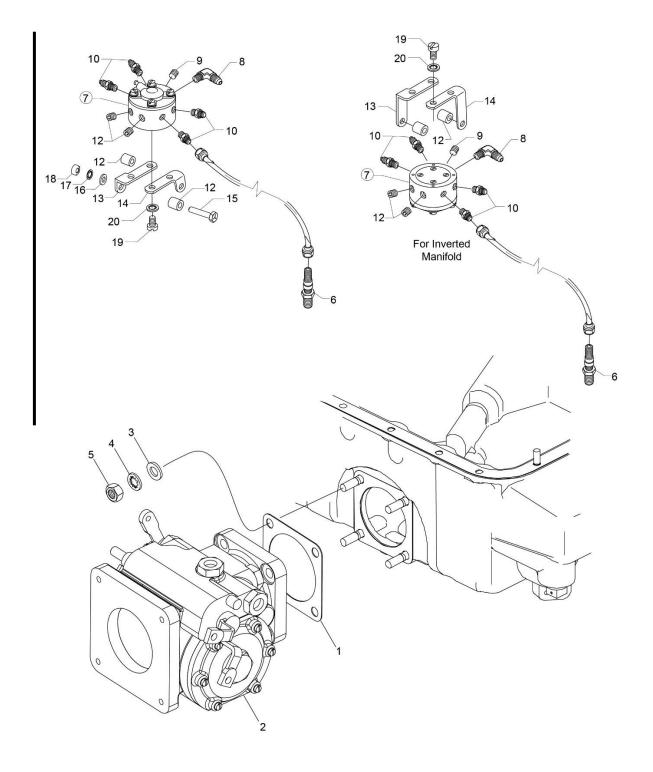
Fuel Injector, Fuel Manifold and Injection Nozzles
